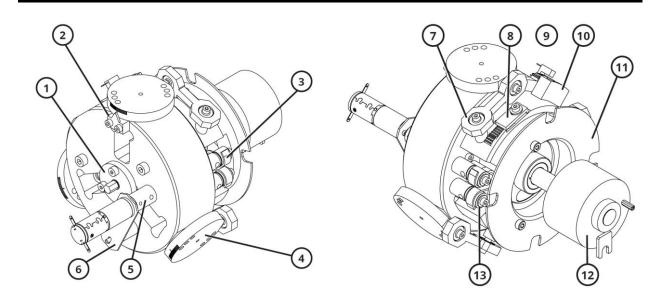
Components of MU Wind Turbine Generator (Side View): (1) Hex key adaptor to drive wind turbine with a motor, (2) Mechanical pitch indicator, (3) Pitch drive belt, (4) Mounting plate for blade, (5) Coupler for pitch motor, (6) Torque arm for pitch motor, (7) Pitch control arm, (8) Clamp to adjust tension on pitch drive belt, (9) (OPTIONAL) Photo interrupter for pitch, (10) (OPTIONAL) Sensor unit for pitch, (11) Timing disk for pitch measurement, (12) Slipring assembly, (13) Guide for pitch drive belt.
